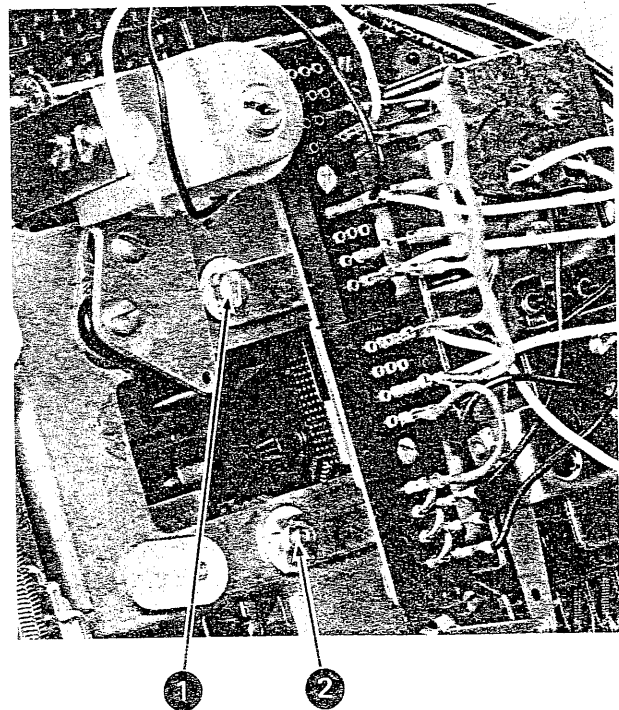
Operational-Magnet-Assembly Removal (Steps 6 and 7)
